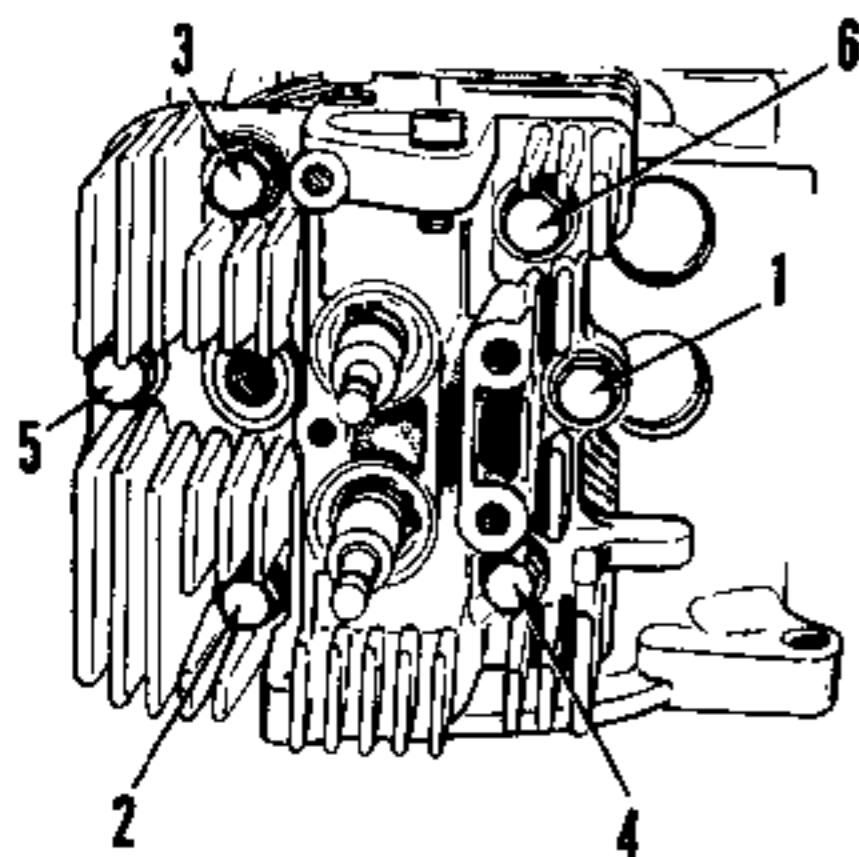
Cylinder head bolts should be loosened and tightened following the sequence shown. The two 1-3/8 inch (34.9 mm) long bolts are installed in positions "1" and "5."
